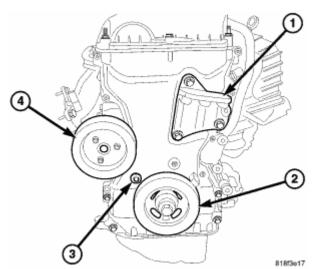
ENGINE FRONT Courtesy of CHRYSLER LLC
